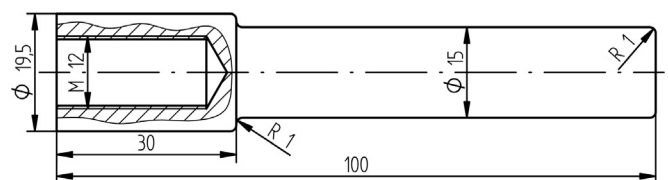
Drawing of the pin shaped sample used for the ejection tests.
